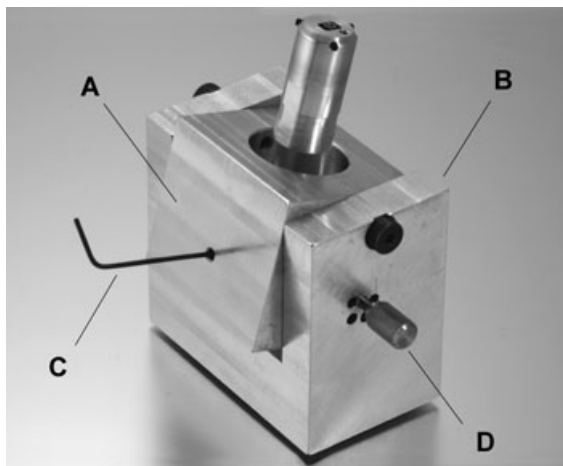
Radially indexable lower fixture mount holder. (A) Moveable element. (B) Fixed element. (C) Lateral hex wrench. (D) Lateral alignment pin.
